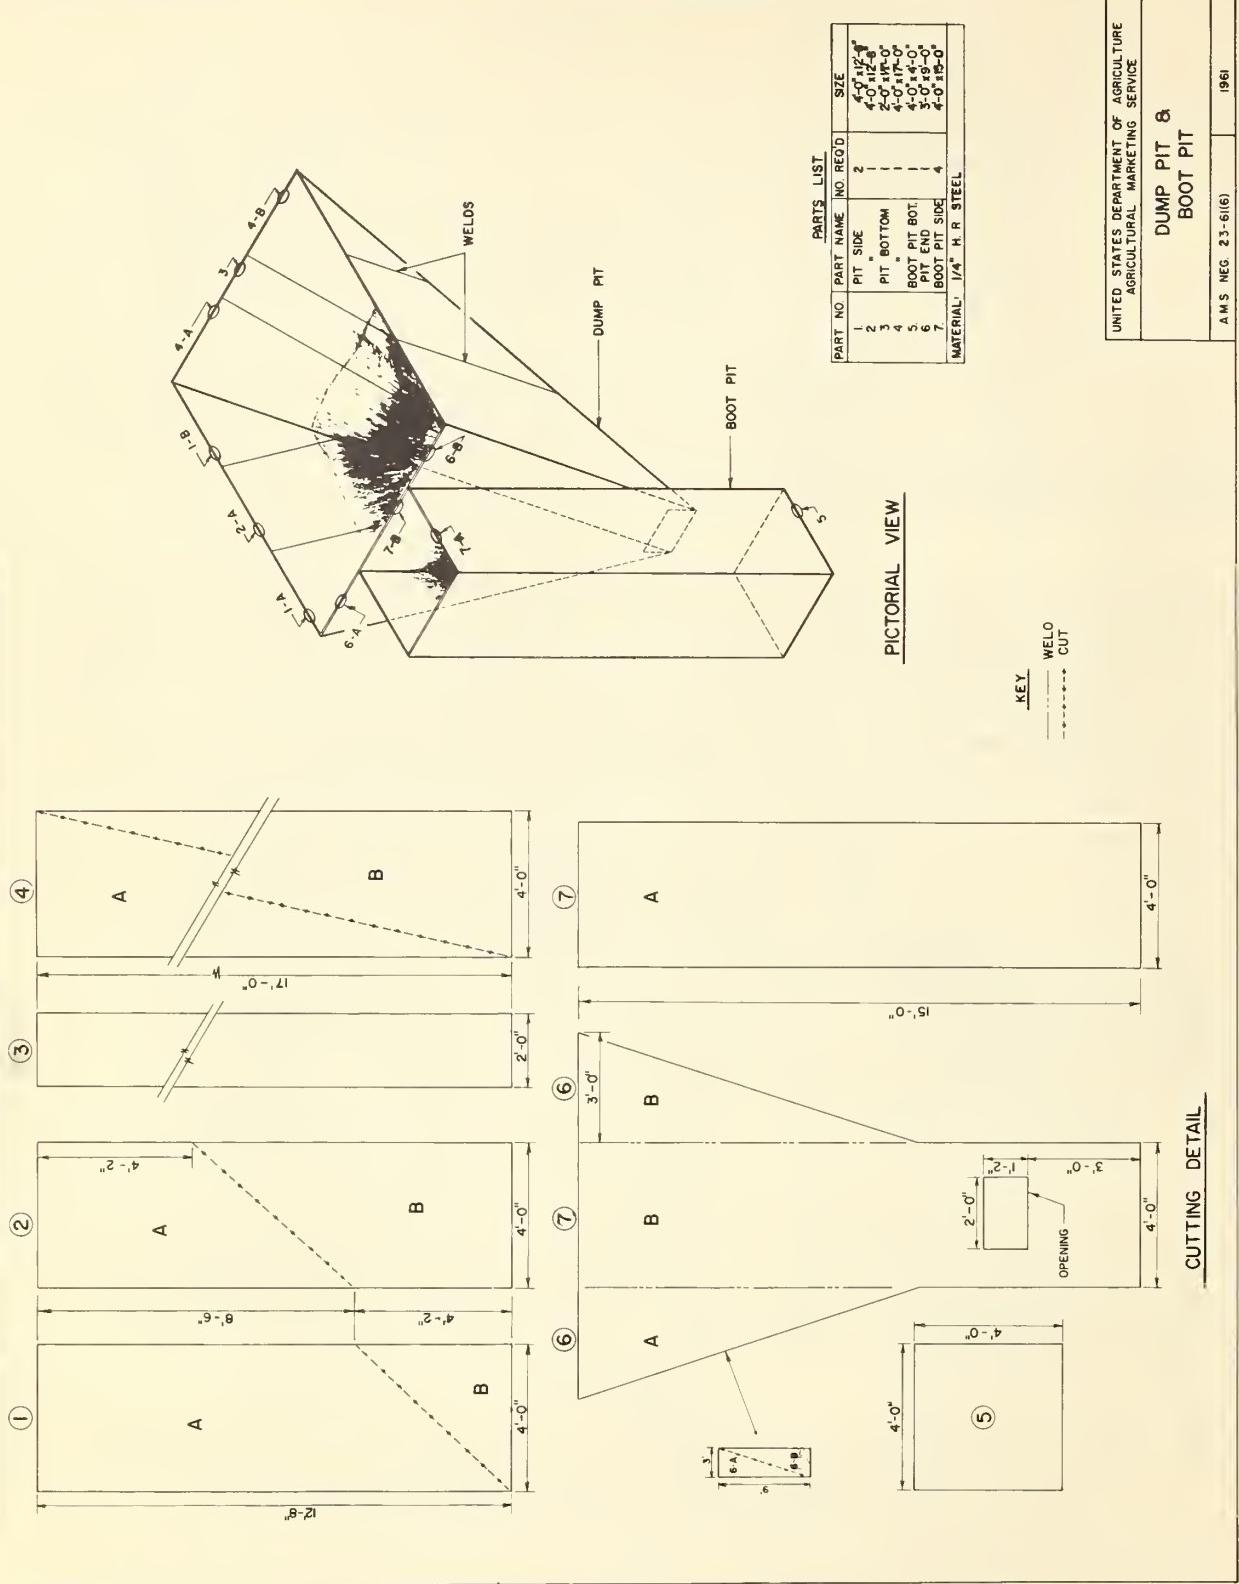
Cutting detail for the improved dump pit and boot pit. There is little waste where steel plates of standard lengths and widths are cut and welded as shown.
